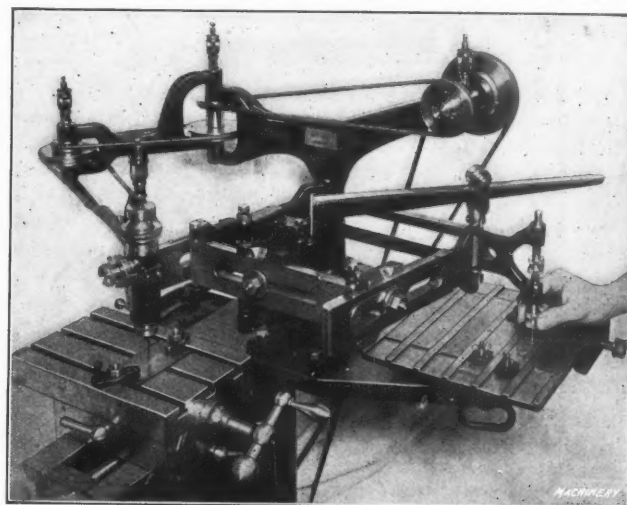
Tables and Mechanism of Machine shown in Fig. 1
